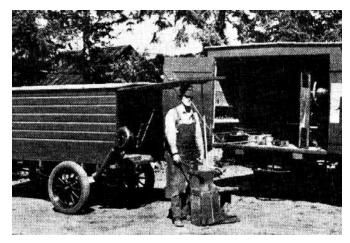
F.W. Pinchbeck's portable blacksmith shop, including a motor-driven electric welder, drill and emery grinder, and a gas welding outfit. The smith used it to travel to customers in the British Columbia interior (*Canadian Blacksmith Gas Welder and Automobile Repairman*, May 1935, p.5)
